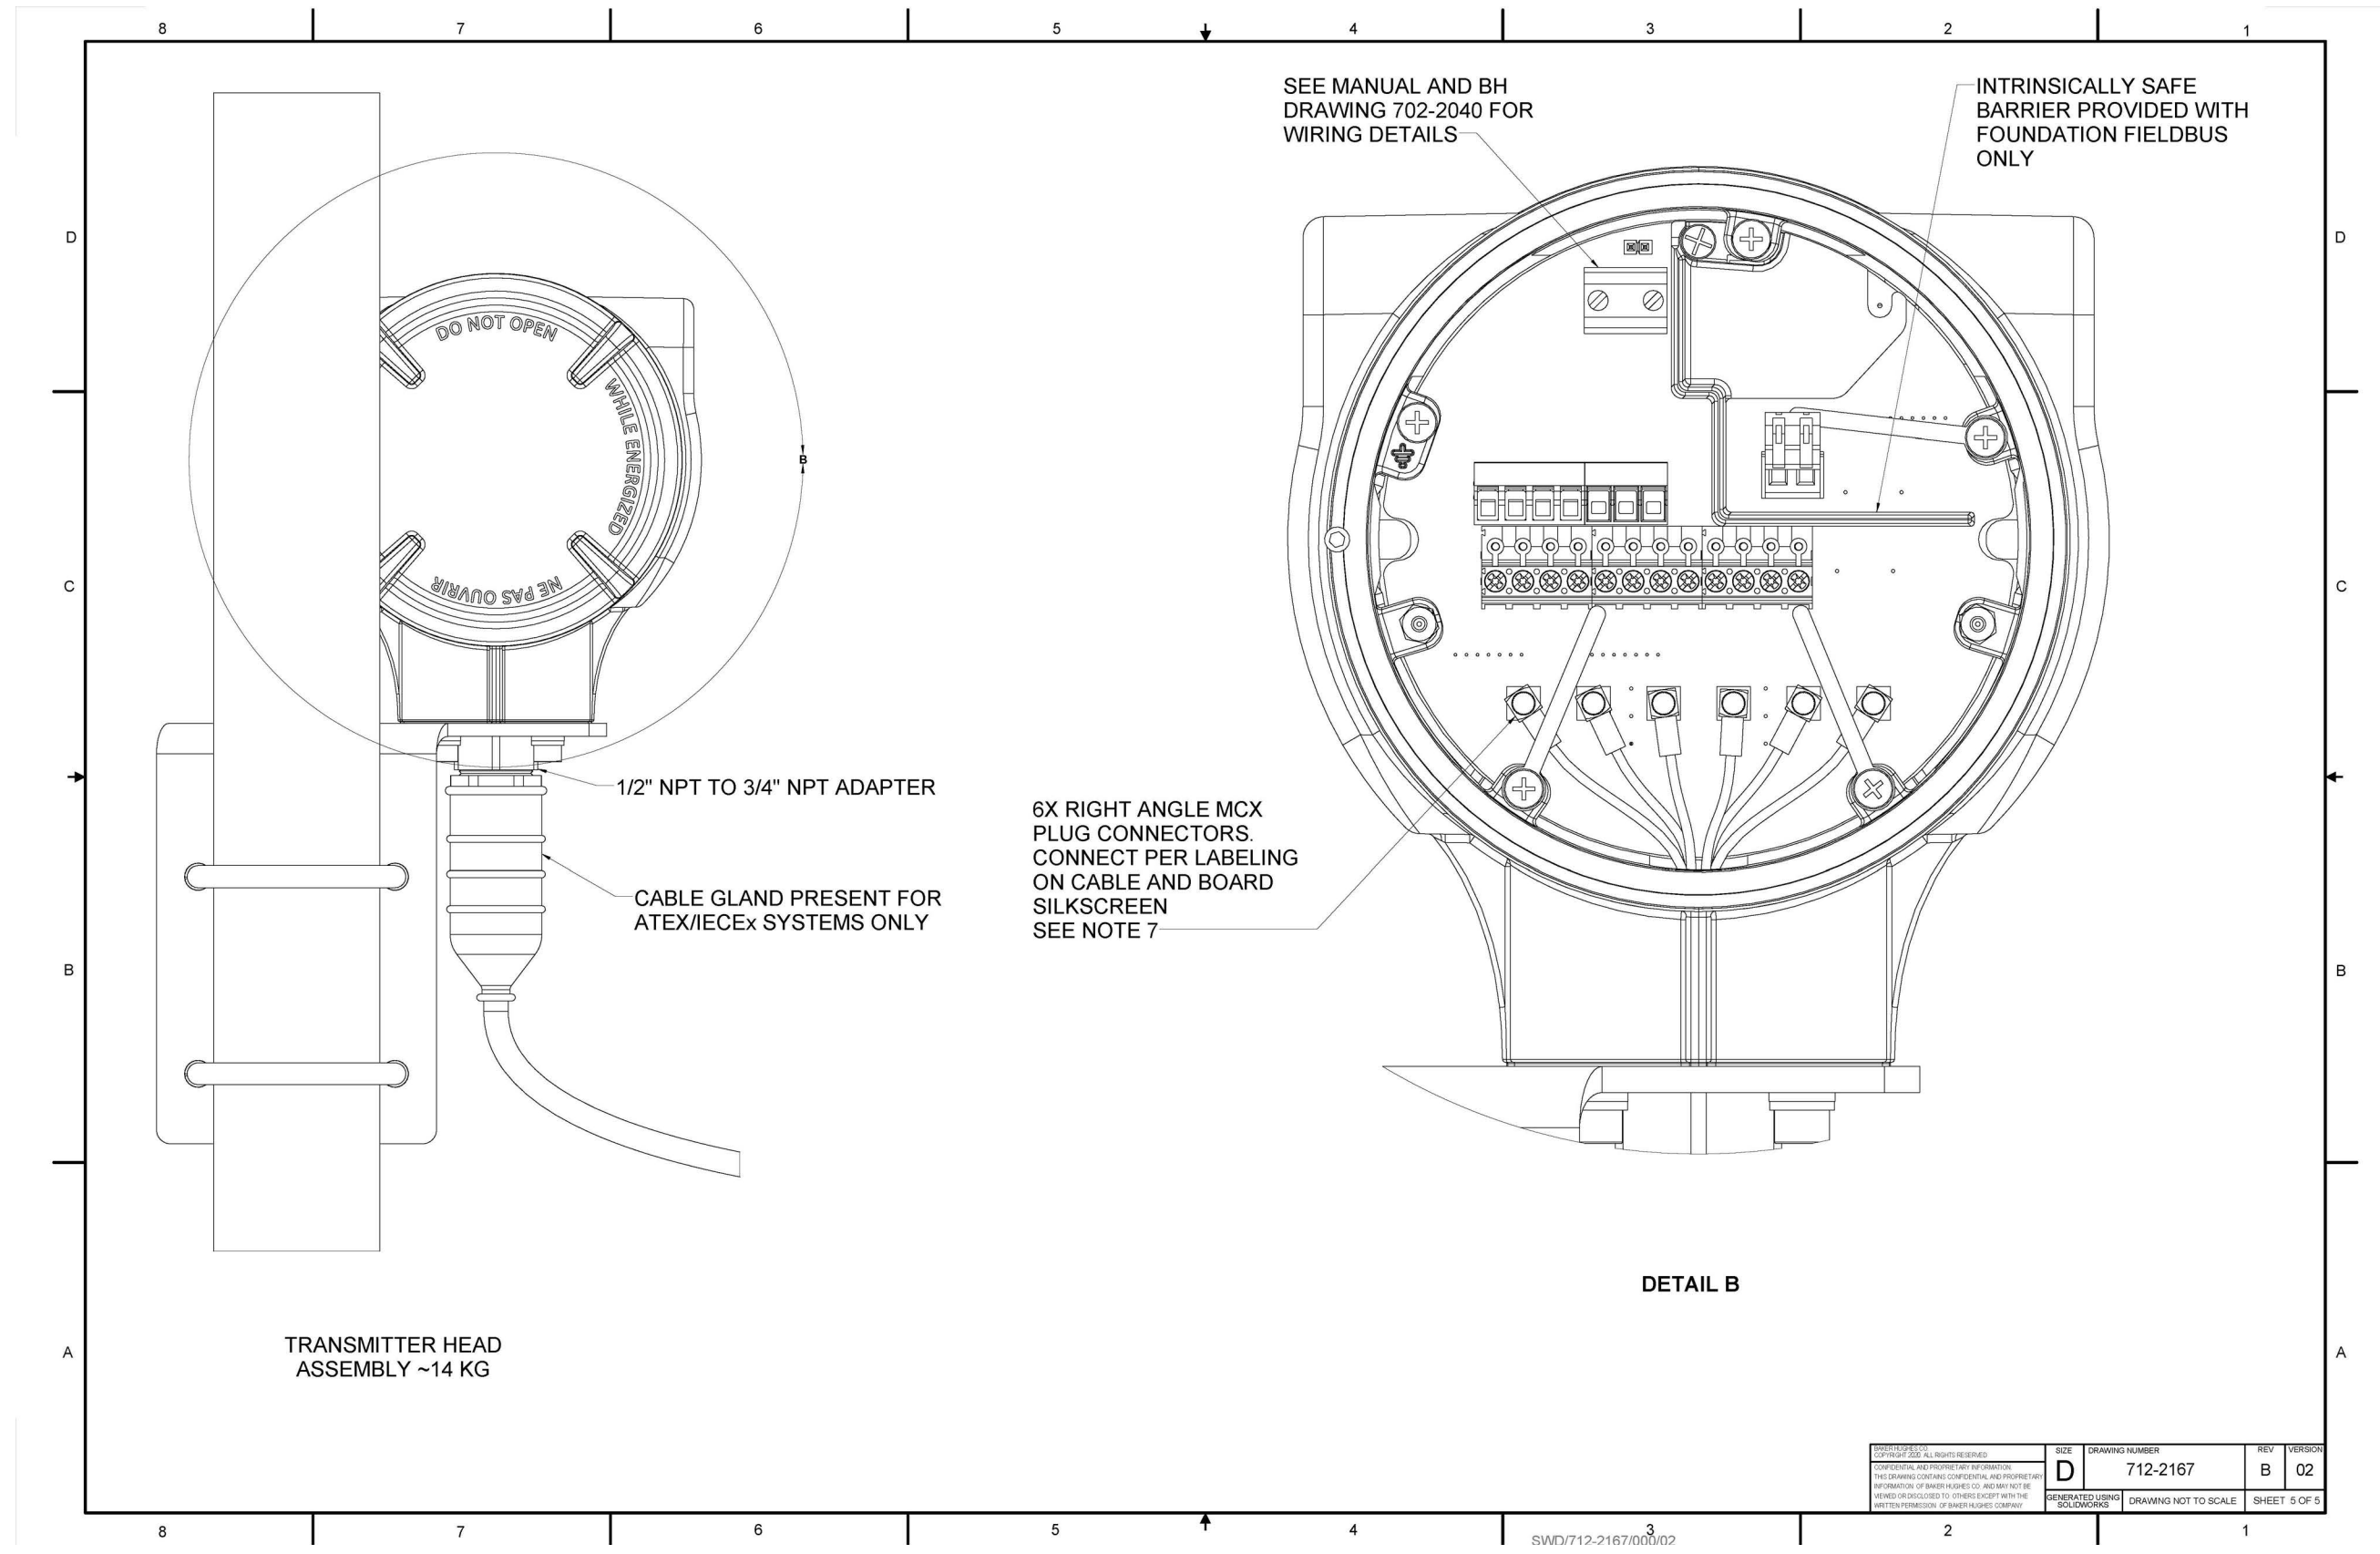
Outline and installation drawing - remote mount (712-2167, sheet 5)
